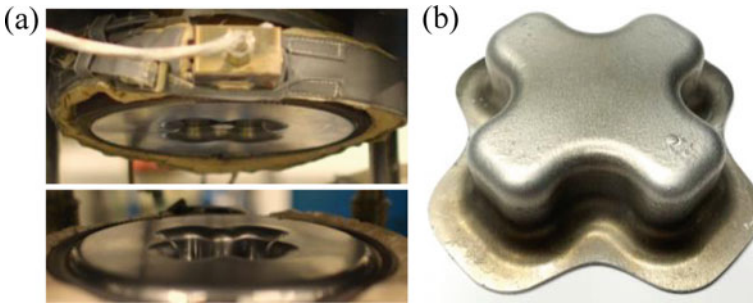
a Experimental setup and b successfully formed cross-die specimen
